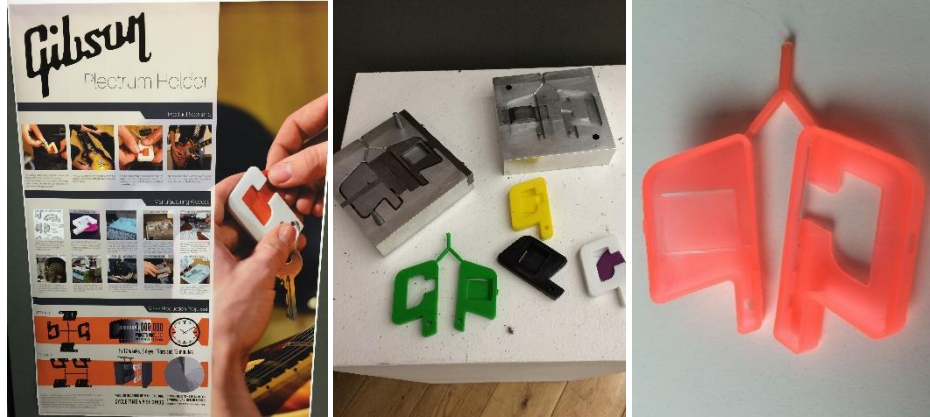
Injection moulding project group assignment submission: display board, mould tool and widget.
